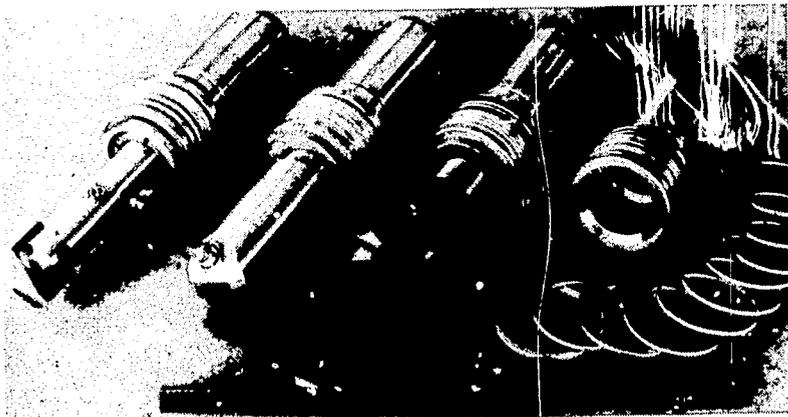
Milwaukee-Matic type tool holders and coding rings
